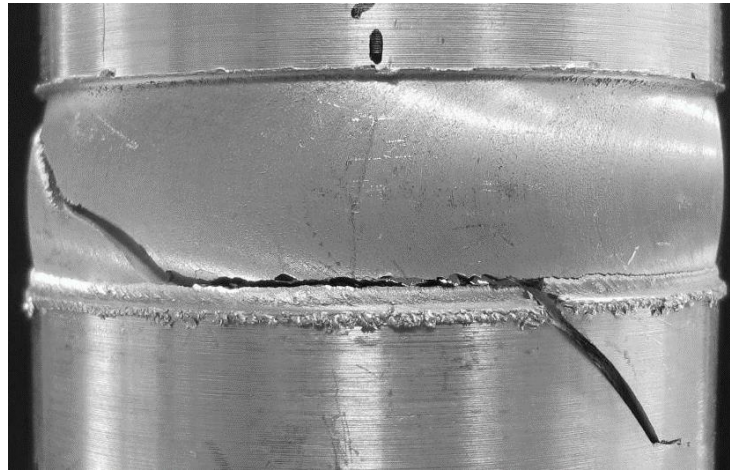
In-phase tension-torsion fatigue test (IPh21) showing that the crack has initiated along the tool shoulder groove on the retreating side and then moved across to the advancing side of the weld.
